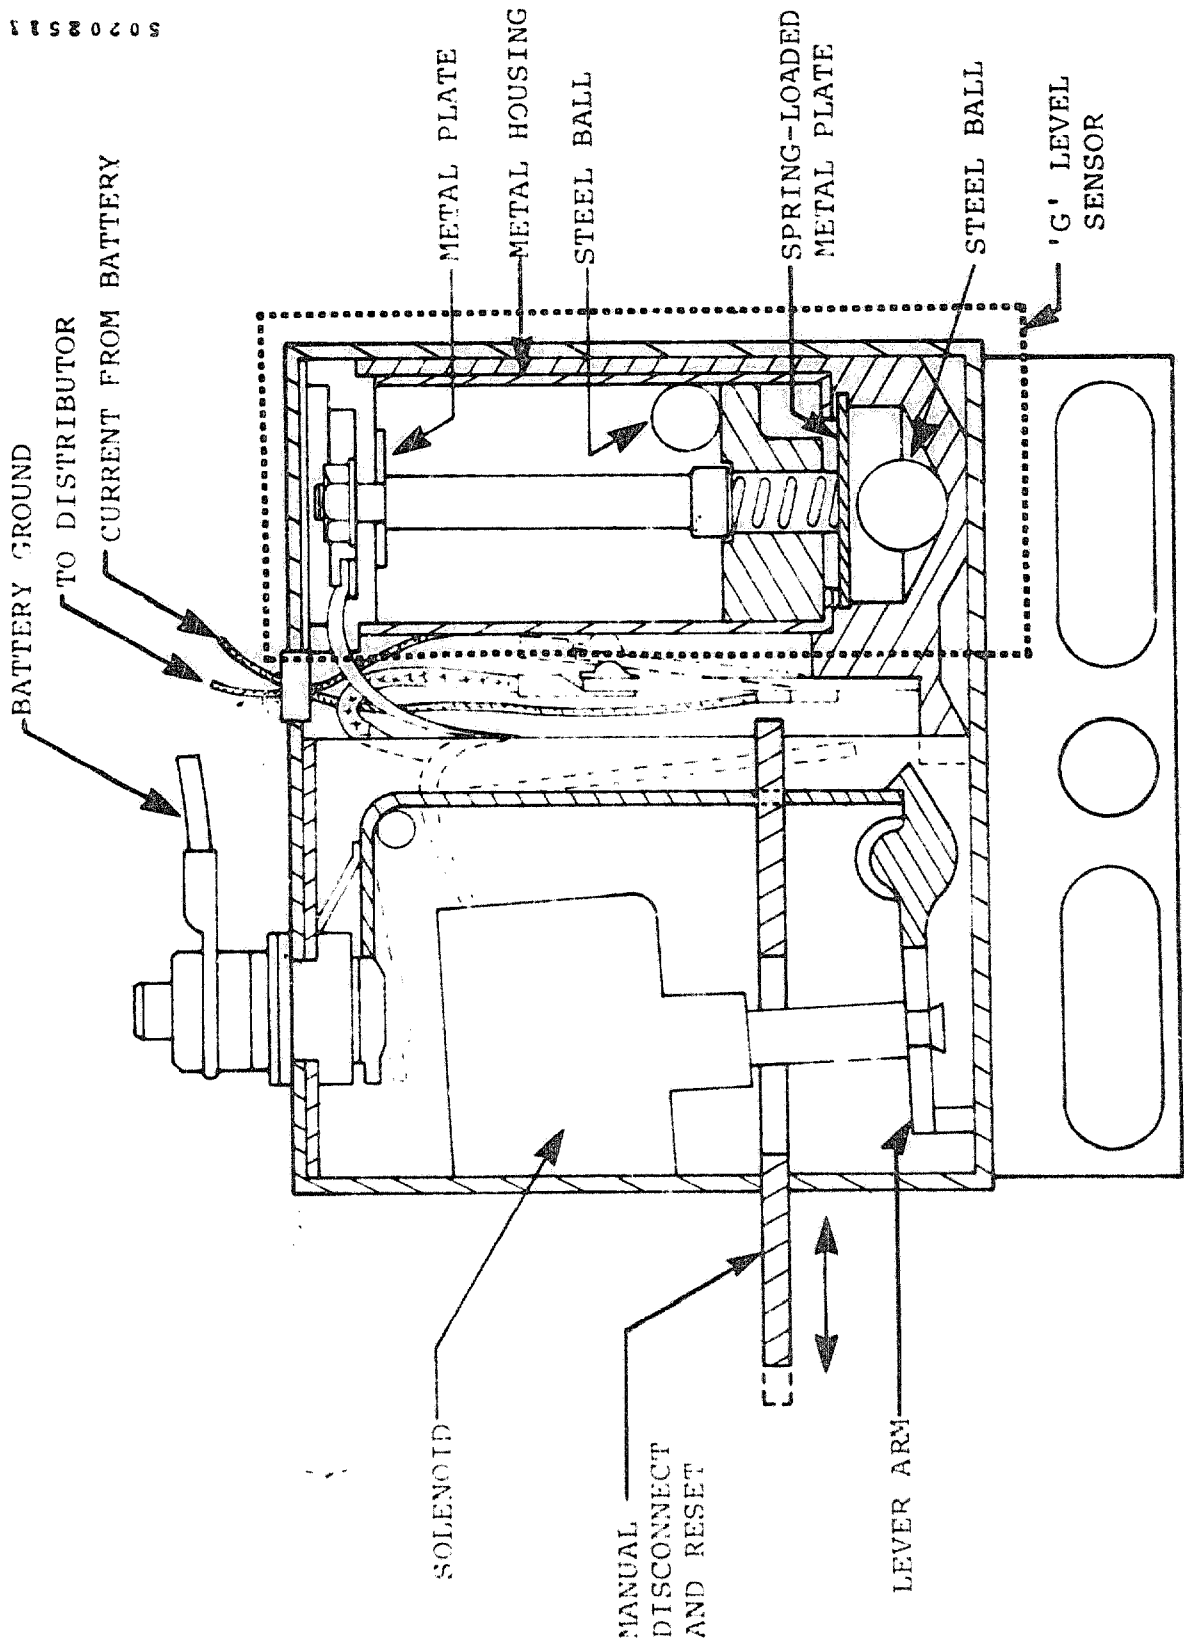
A.C.B. Corporation Electrical Shutoff Switch.
